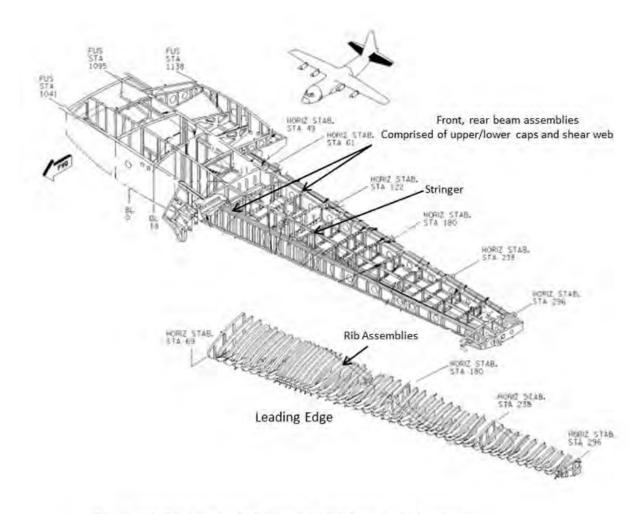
Schematic of Horizontal Stabilizer and Elevator
